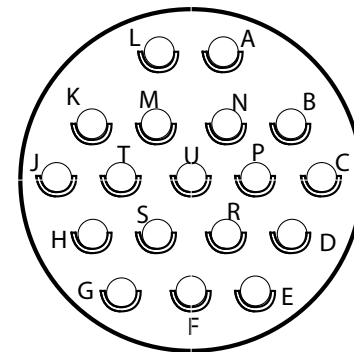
Wiring View, System Cable Plug (Solder Cups Shown)
